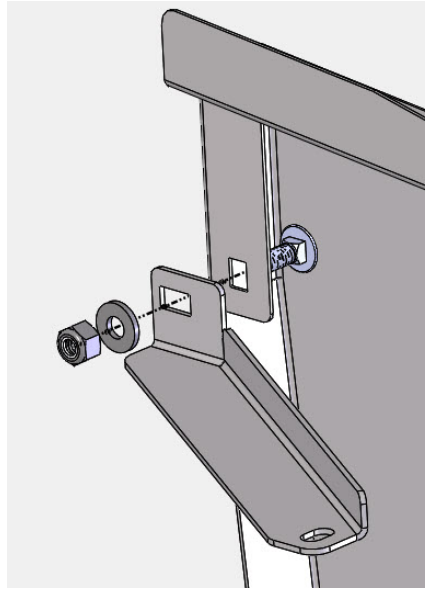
Bolts to Remove When Removing the OEM Panel (Driver Side Shown)
